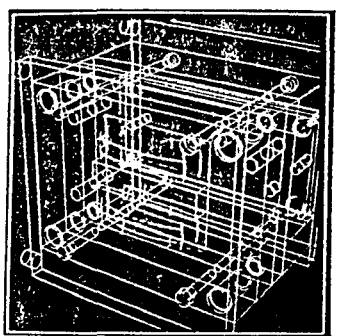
3-D model of moldbase formed by "Modular CAD system" (After moldbase designed)
